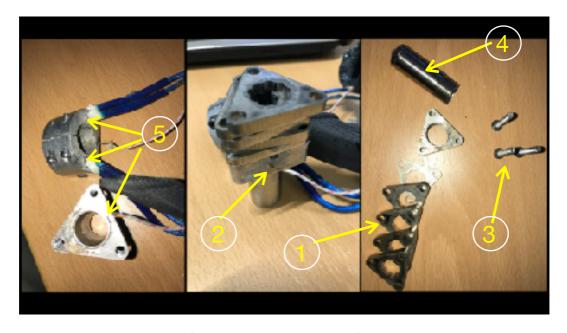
The lower Area: 1) Triangular metallic plaques; 2) Lower 9mm metallic plaque; 3) Screws; 4) Metallic Cilinder + Noozle; 5) Thermocouples
